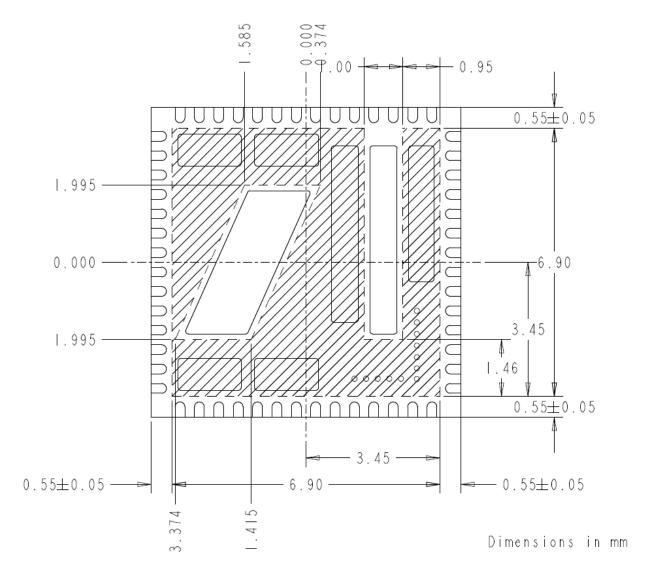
EN6382QI Package - PCB Footprint Keepout (Bottom view)
